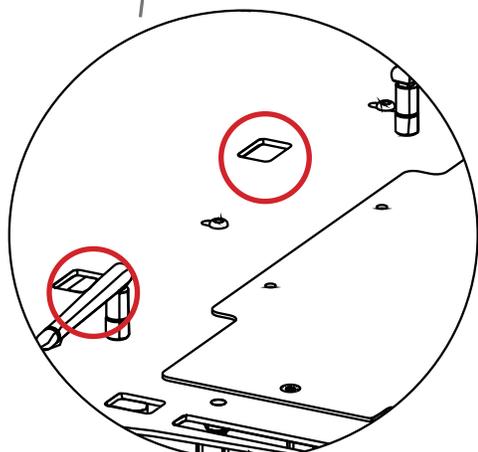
Top view of desk keyboard and mouse cable routing ports
